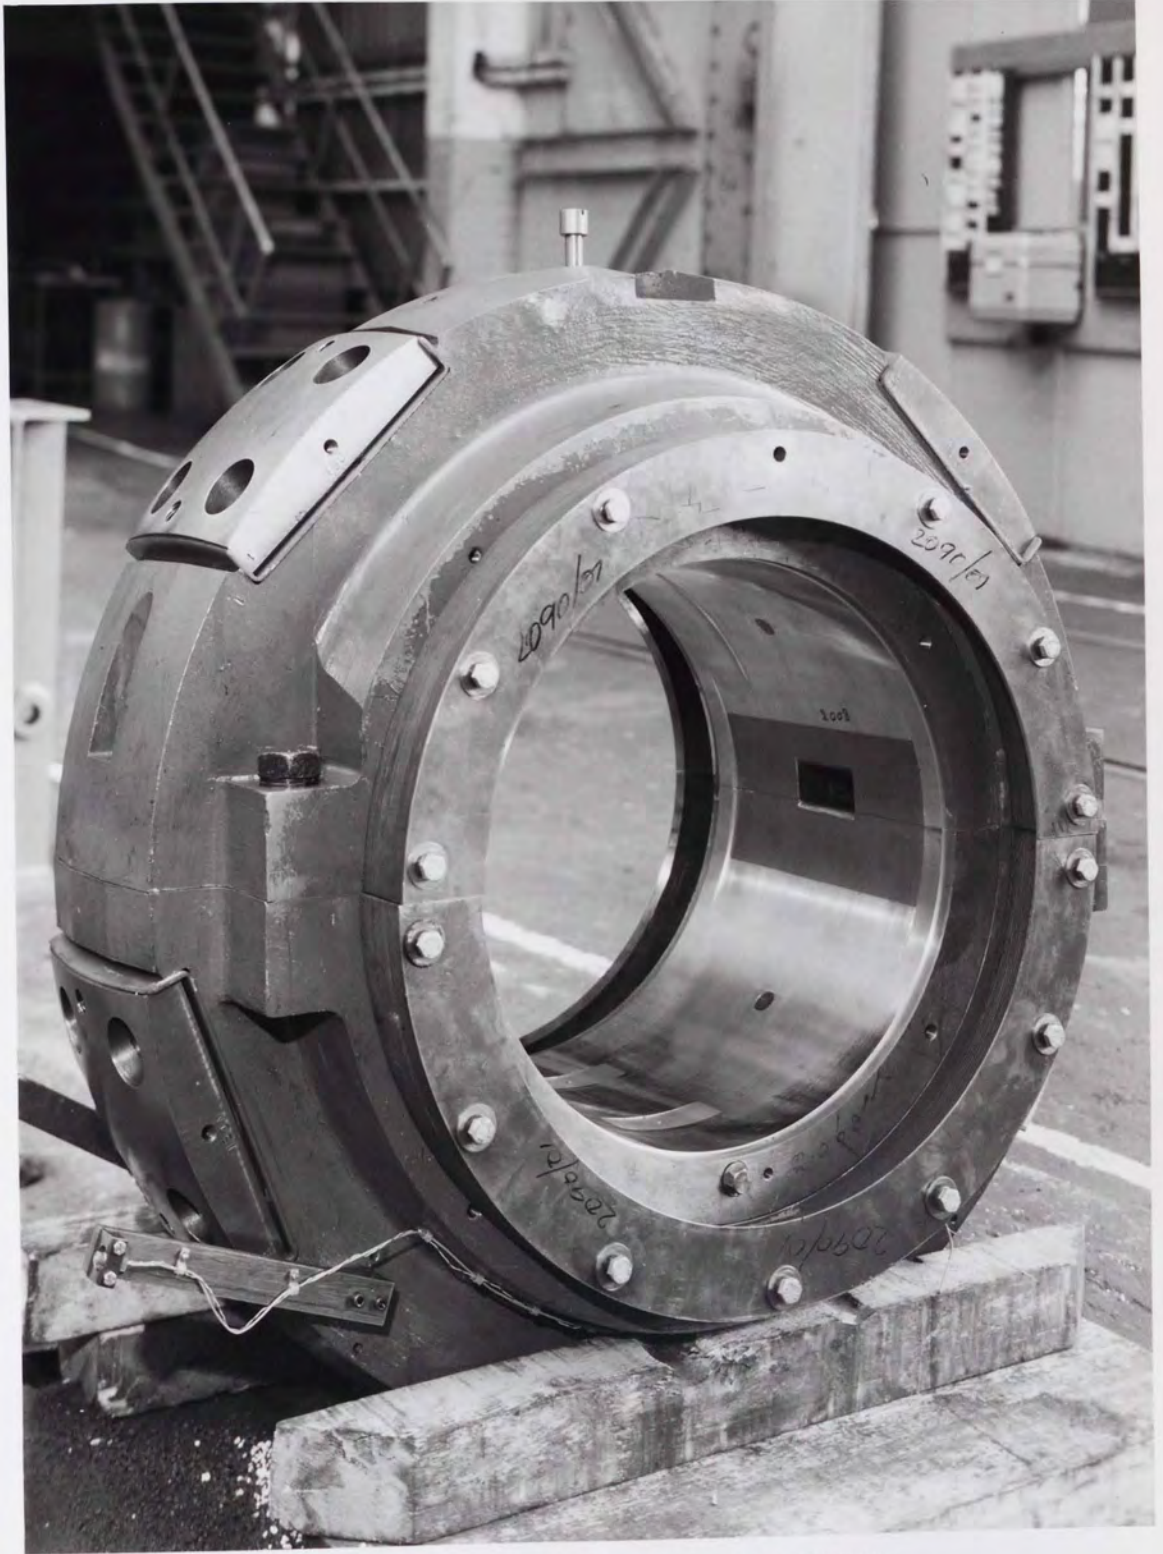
A TYPICAL LARGE JOURNAL BEARING BUSH
